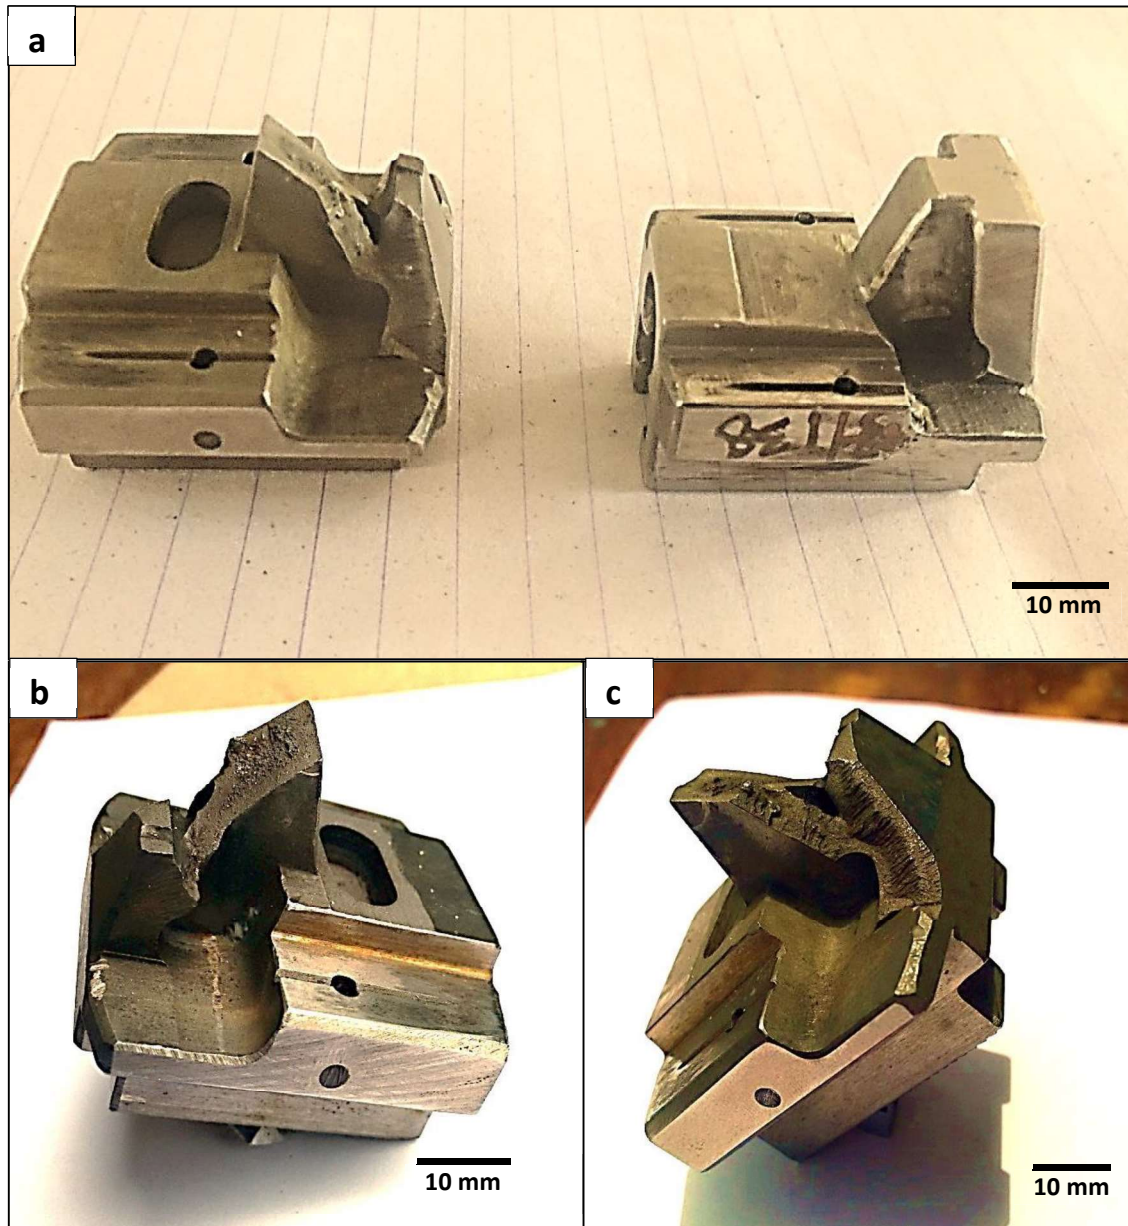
Different views of failed jaw-carrier showing the fracture-location and surface features; (a) side-view of the failed jaw-carrier in comparison with a good jaw-carrier showing the location of the fracture, (b, c) oblique views from either side indicating the brittle fracture features.
